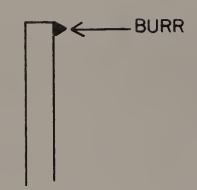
The burr on the edge of the scraper blade does the cutting.
